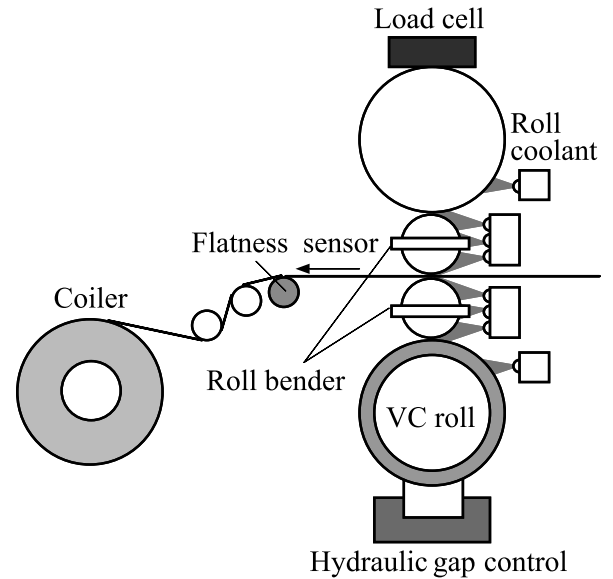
Foil rolling mill equipment and the flatness control actuators.
